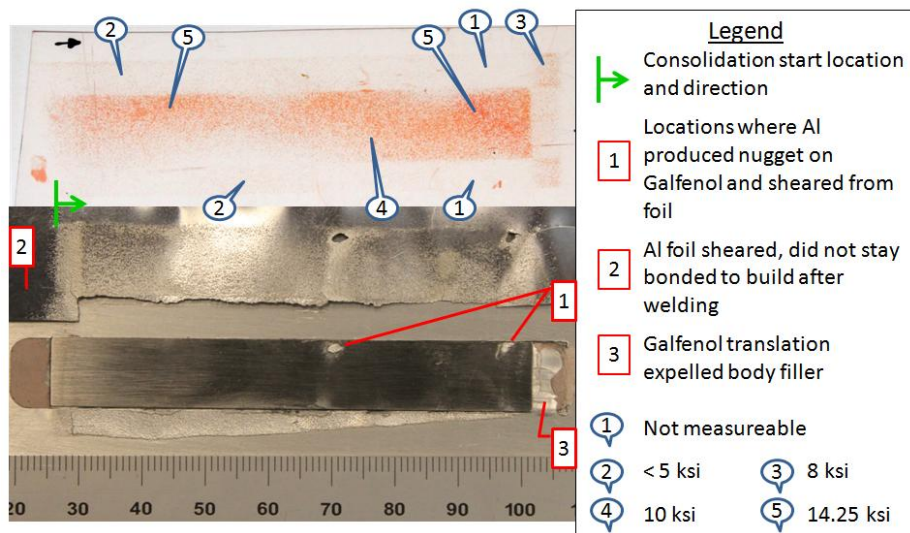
Post welding and pressure film of rolled Galfenol steel UAM build 5
